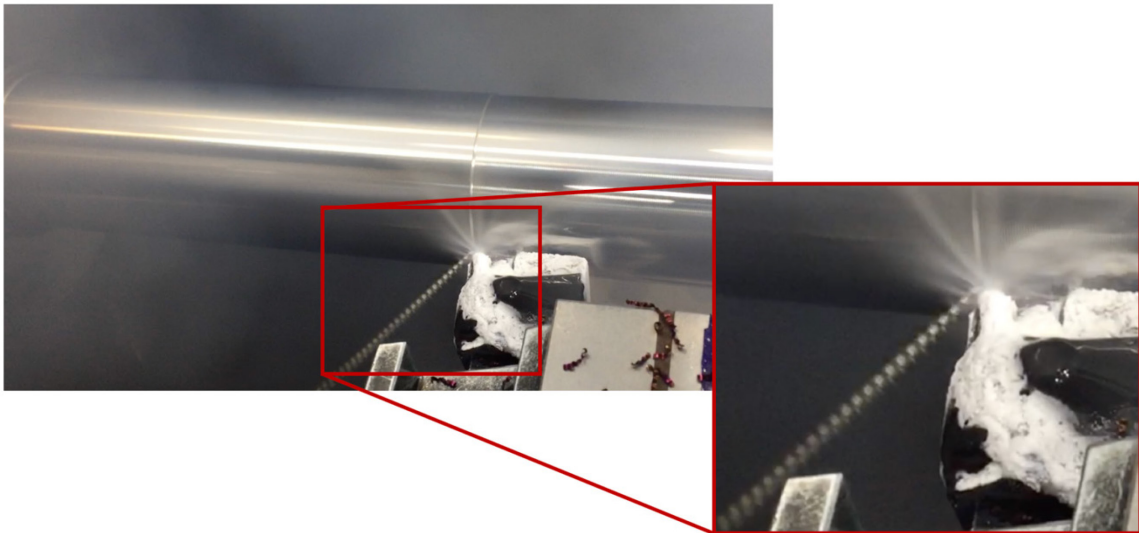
Chip formation during cryogenic machining with up-curl and side-curl flow resulting in a continuous tubular-shaped chip
